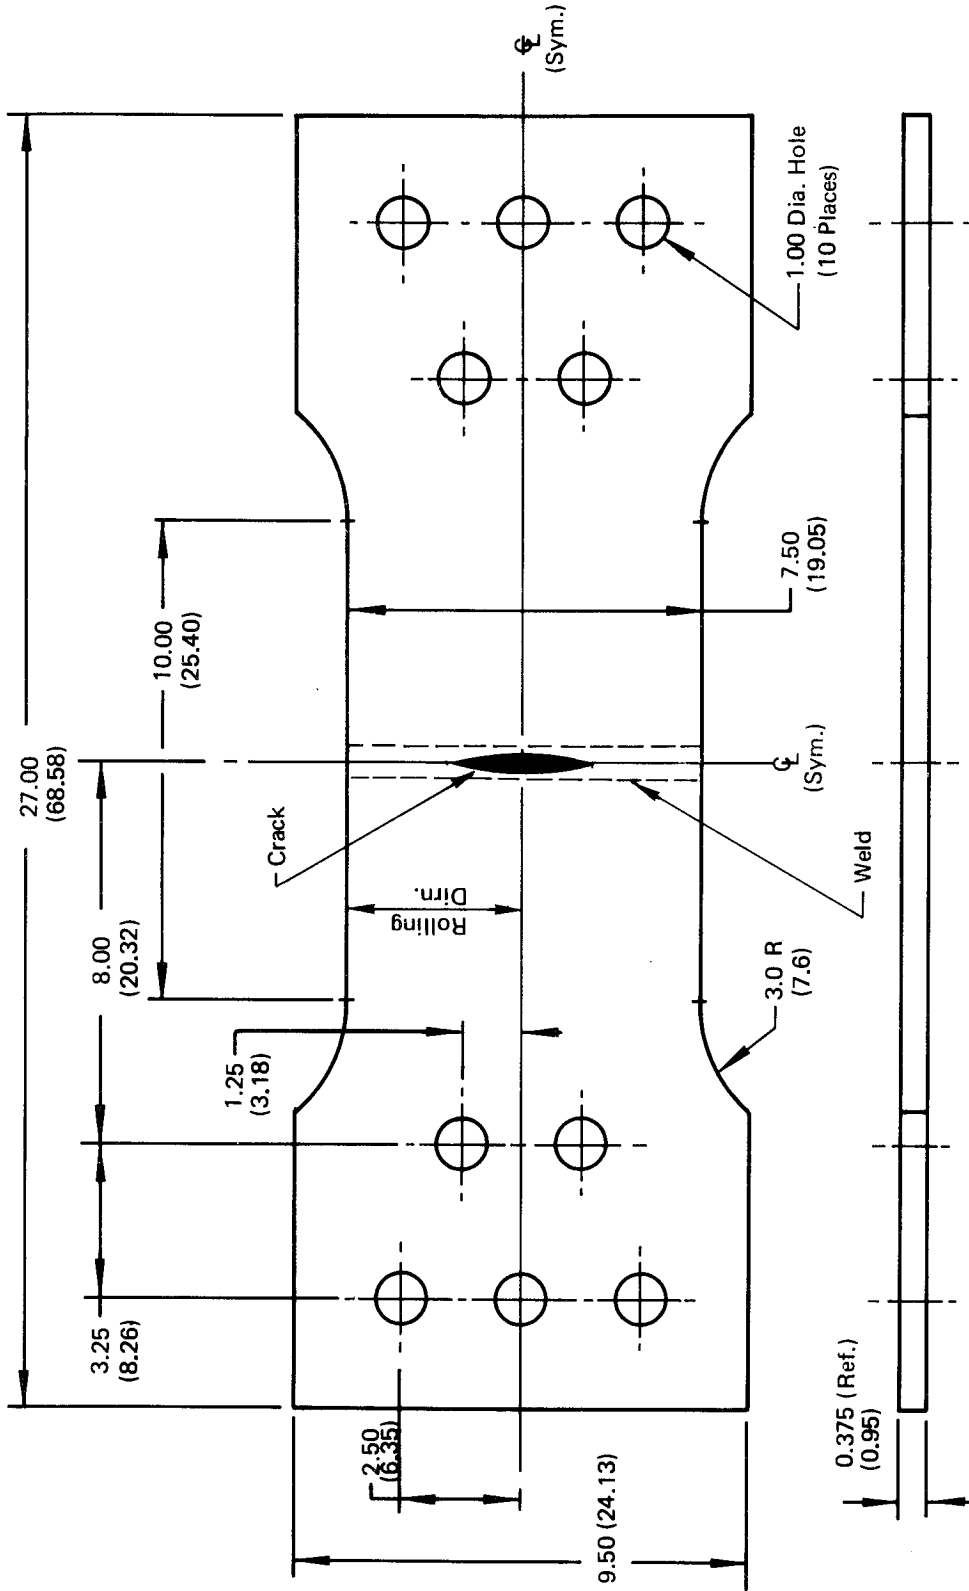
304 Stainless Steel Surface Flawed Specimen
